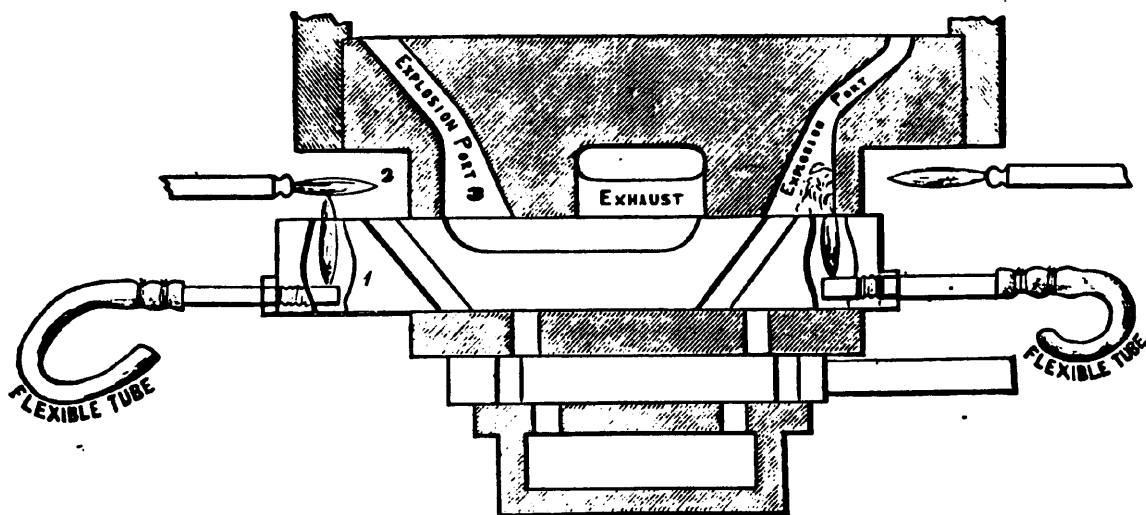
Slide valve and flame ignition system of the Hugon engine
